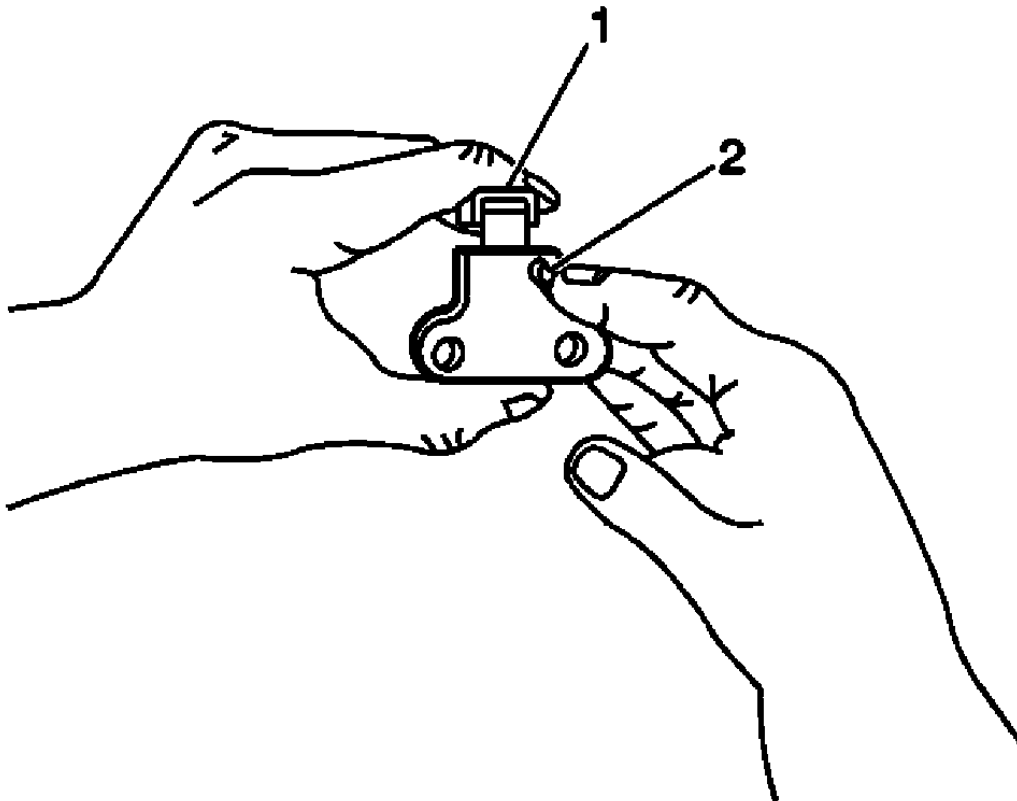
View Of Primary Camshaft Drive Chain Tensioner Shoe & Ratchet Lever
